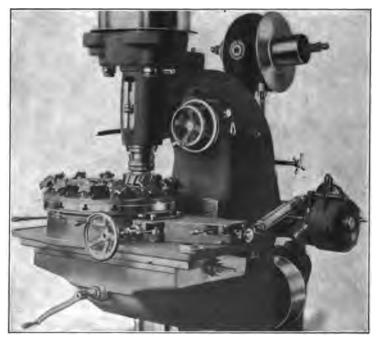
Becker Vertical-spindle Machine for Continuous Circular Milling
